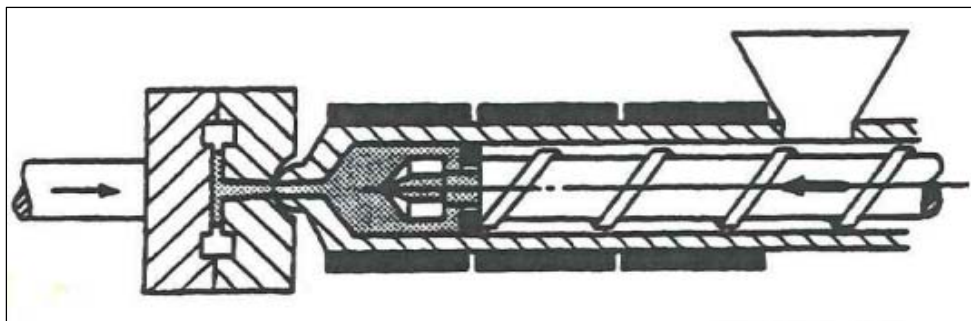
Injecting plastic into the mold (R.J.Crawford, Page 281, 1998)
